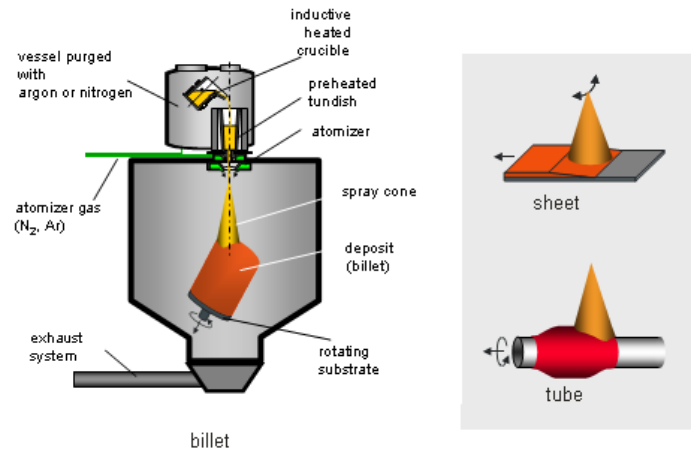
Principle of spray forming pre-forms: billet, tubes and sheet.
